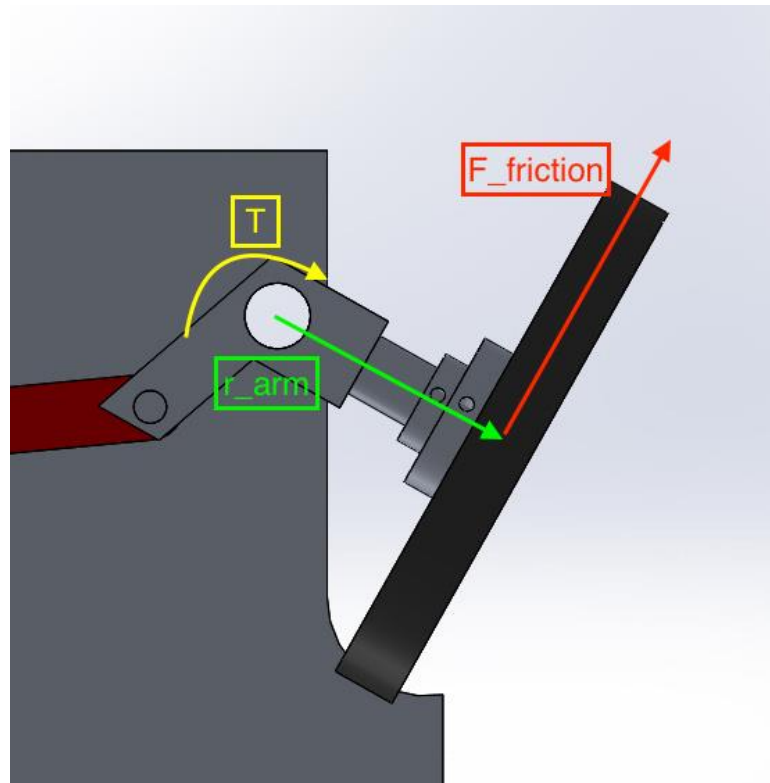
Illustration of the front wheel assembly and the torque required to turn a single wheel.
